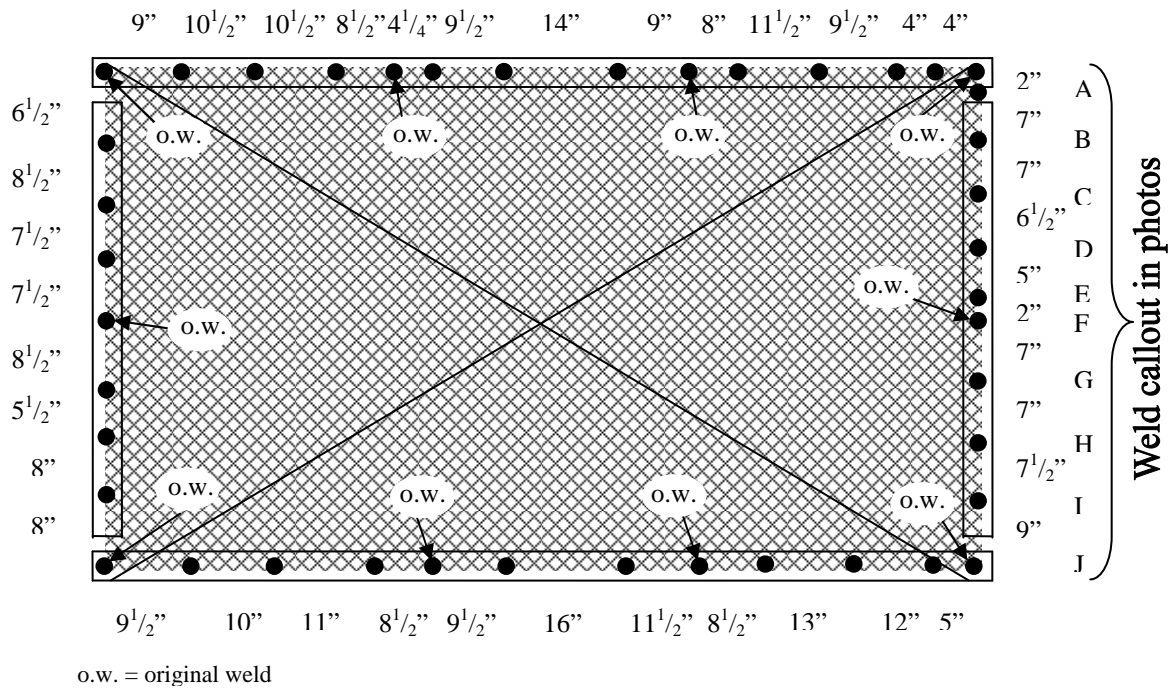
Weld Spacing for Series 3 Tests on Frame 1
